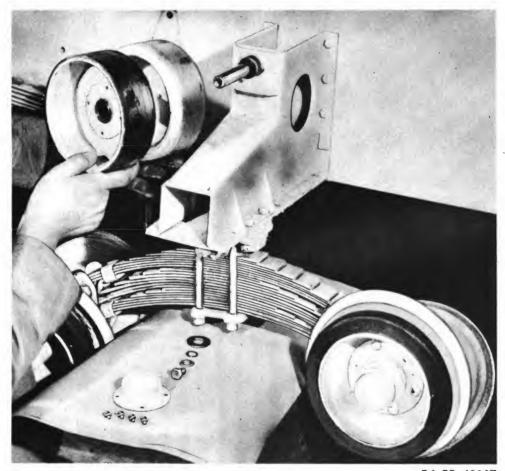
Guide Wheel, Wheel Bearings, and Bracket
